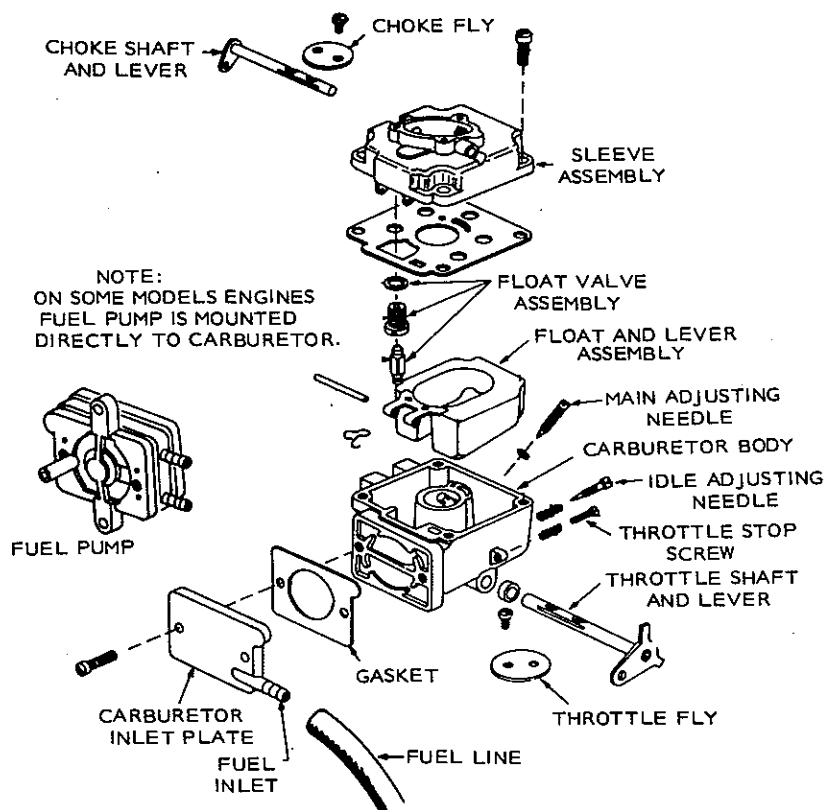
EXPLODED VIEW—BF ENGINE CARBURETOR
